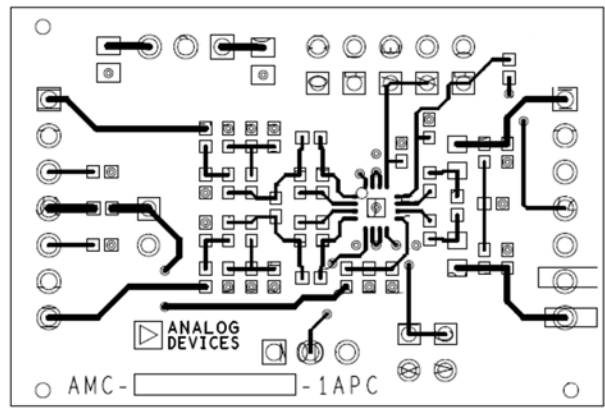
ADA4945-1CP-EBZ Evaluation Board Layout Pattern, Primary Side
